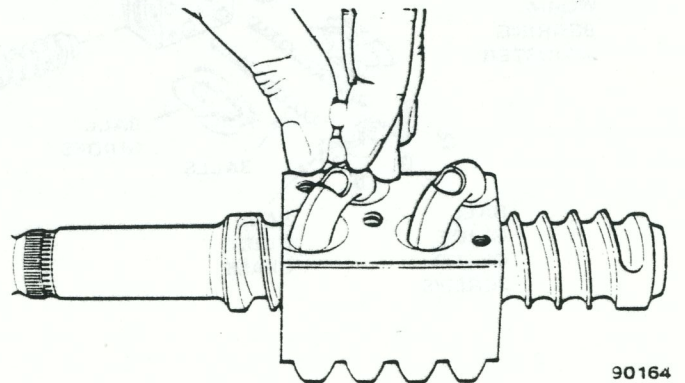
K-7 Installing Bearings in Ball Nut Circuits
